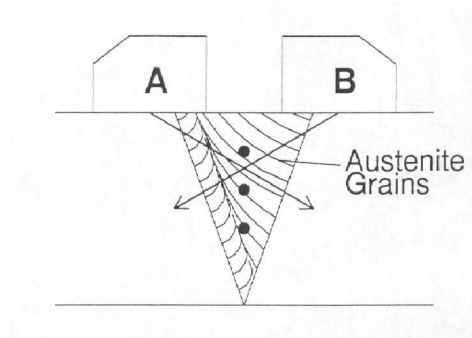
An example of a weld in which the grain macrostructure is asymmetric about the weld centreline.
